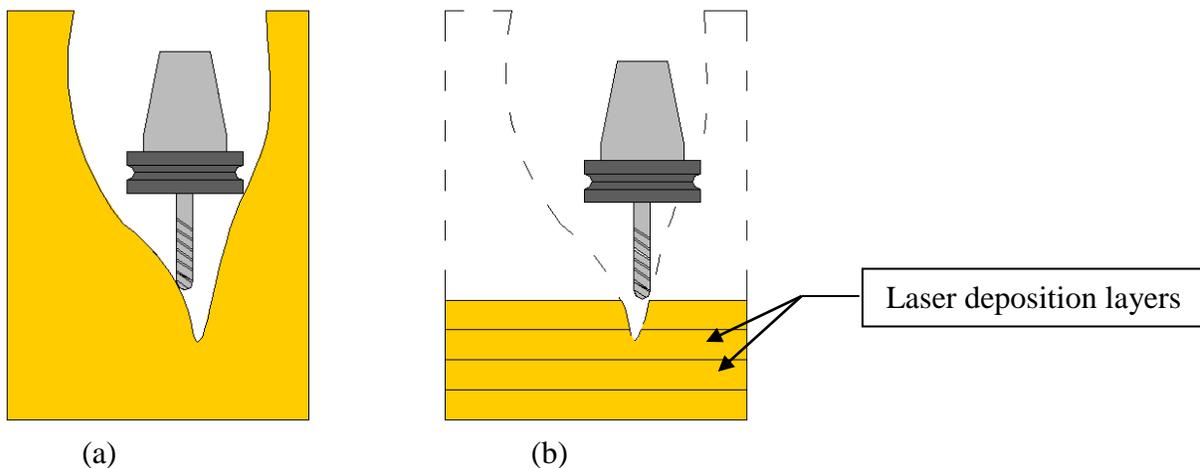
machining feasibility (a) machining whole part by conventional technique causes collision, (b) machining layer by layer.
